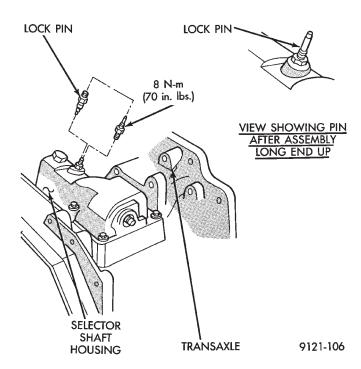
Manual Transaxle Pinned in the Neutral Position to Adjust Gearshift
